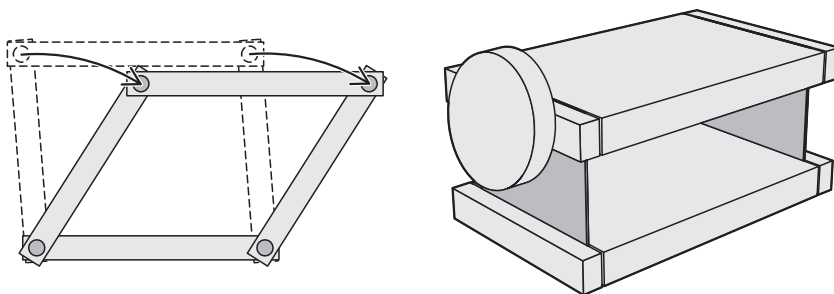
The left one is a parallel four bar link mechanism and the right is a basic porch bearing assembled using two parallel flat springs and a round mirror.
